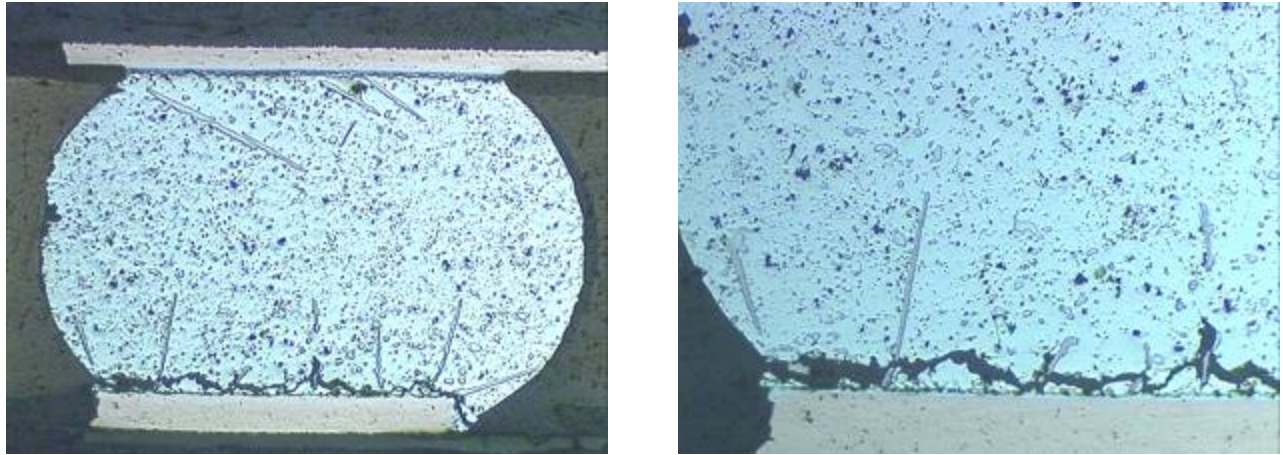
(left) BGA-225 SAC-SAC solder joint; (right) magnified view of solder joint crack path (test vehicle 86)
